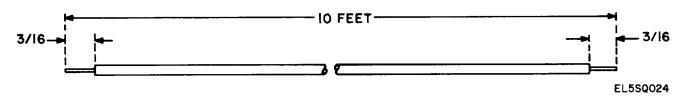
Stripping Details, Cables IAI WI and W2.
